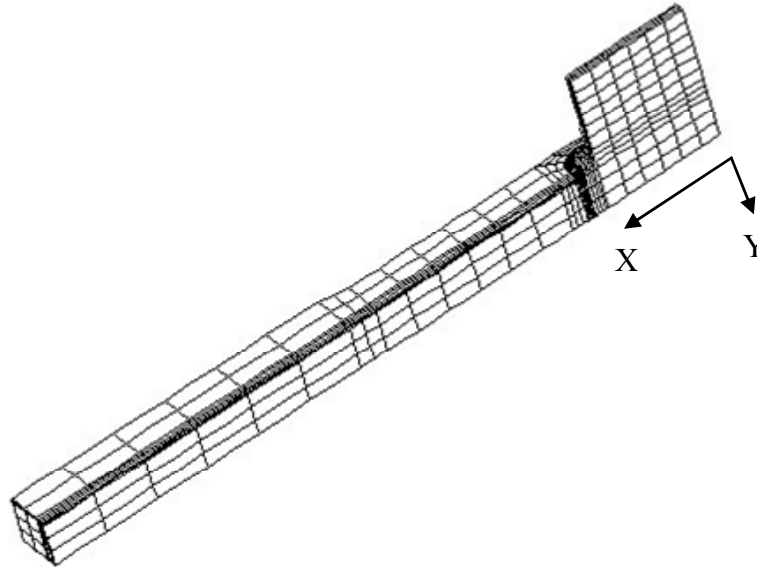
The finite element model of longitudinal attachment test specimen.
